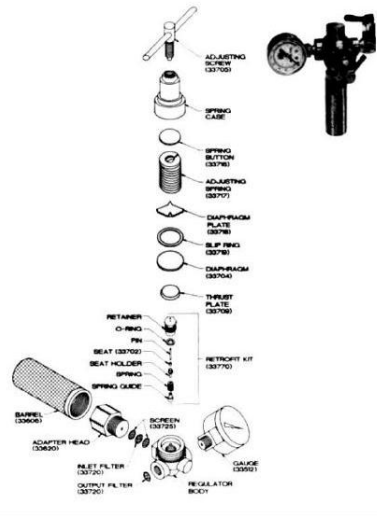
CO₂ Pressure Assembly, Exploded View
